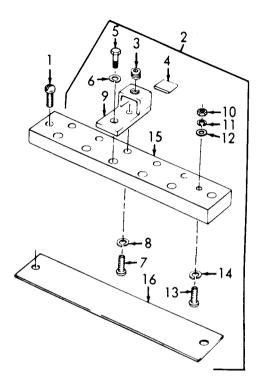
Dynamotor-Welder Frames, Field Coils, Pole Shoes, Brush Holders, and Mounting Rings, Exploded View (Sheet 3 of 3).
